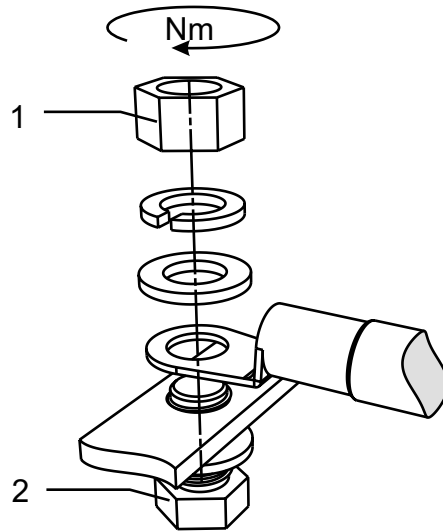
Tightening torques for contact nuts and mounting bolts
